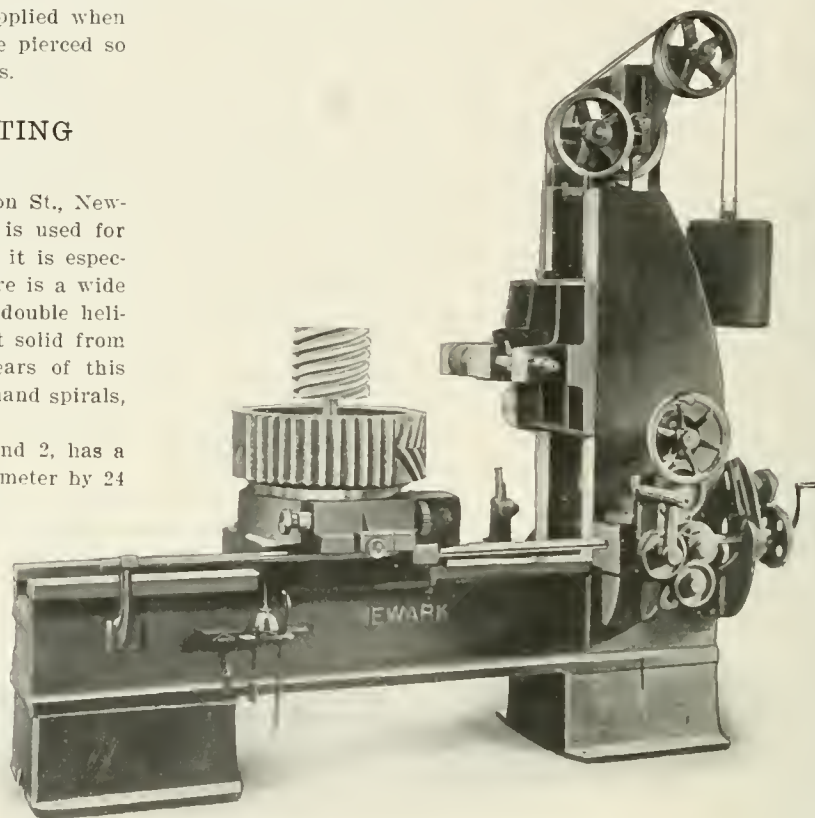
Machine for Cutting Wood Gear Patterns—Example of Work on Machine
